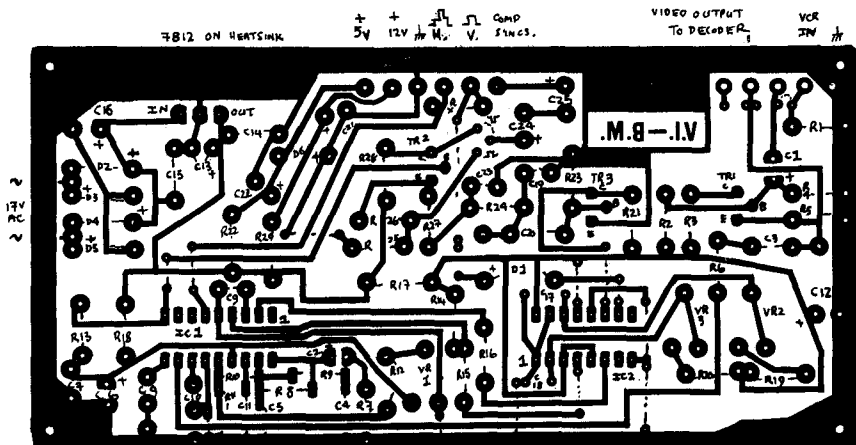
PRINTED CIRCUIT LAYOUT AND COMPONENT OVERLAY.
